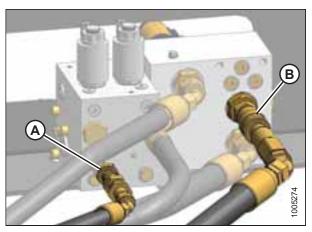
M150/M155/M155*E4* without Reverser Valve
